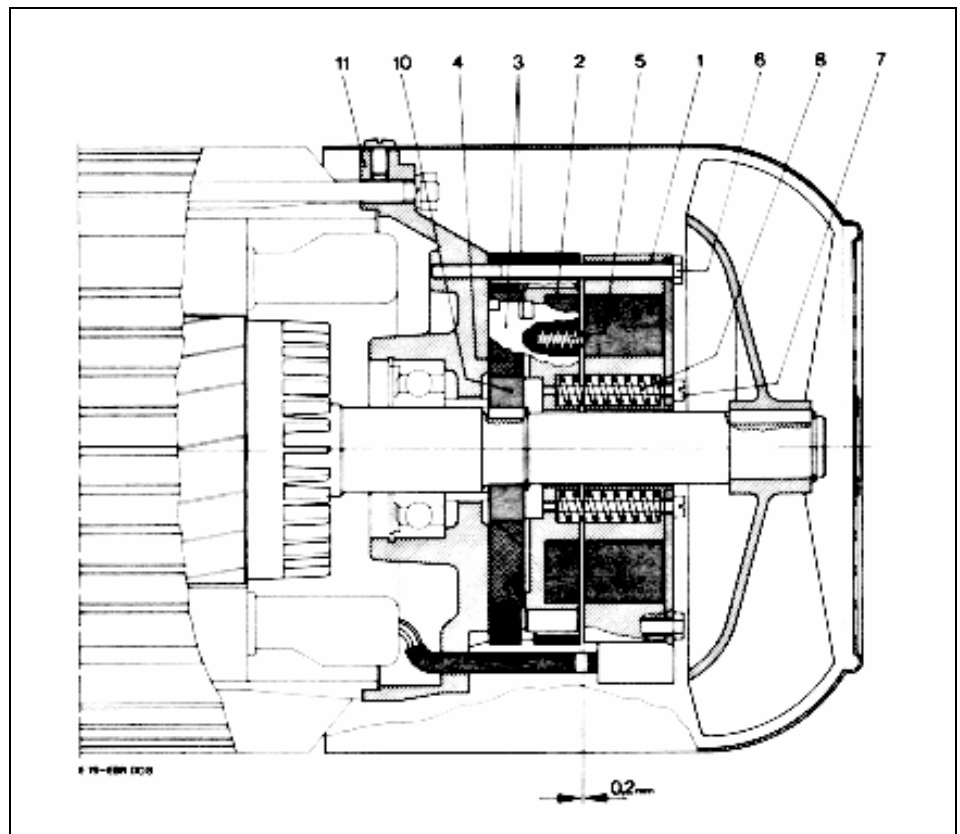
Single-disc spring-loaded brake with three-phase solenoid release, mounted on the end shield; type series 73 (BINDER)
